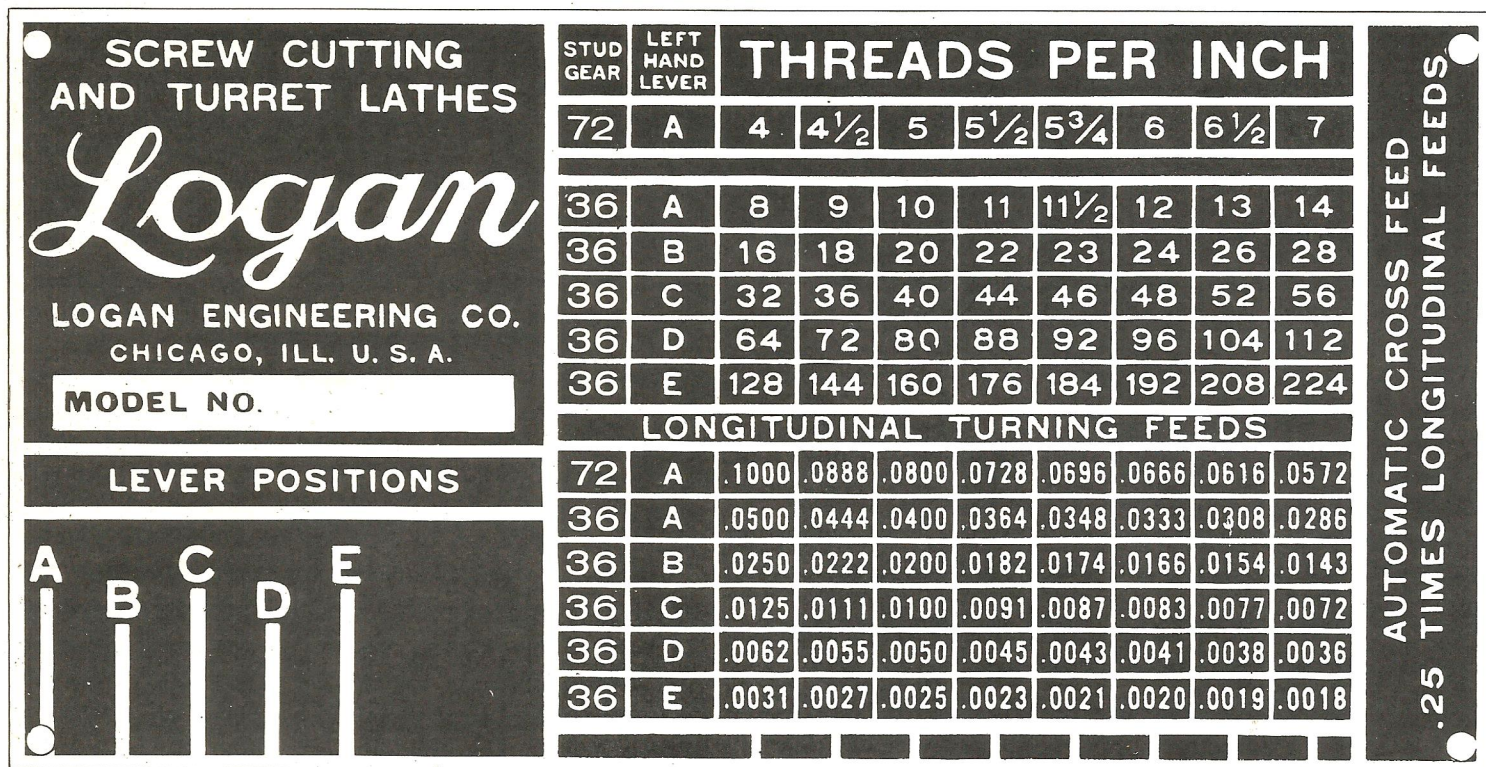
THREAD AND FEED CHART ON LOGAN QUICK CHANGE GEAR LATHES
